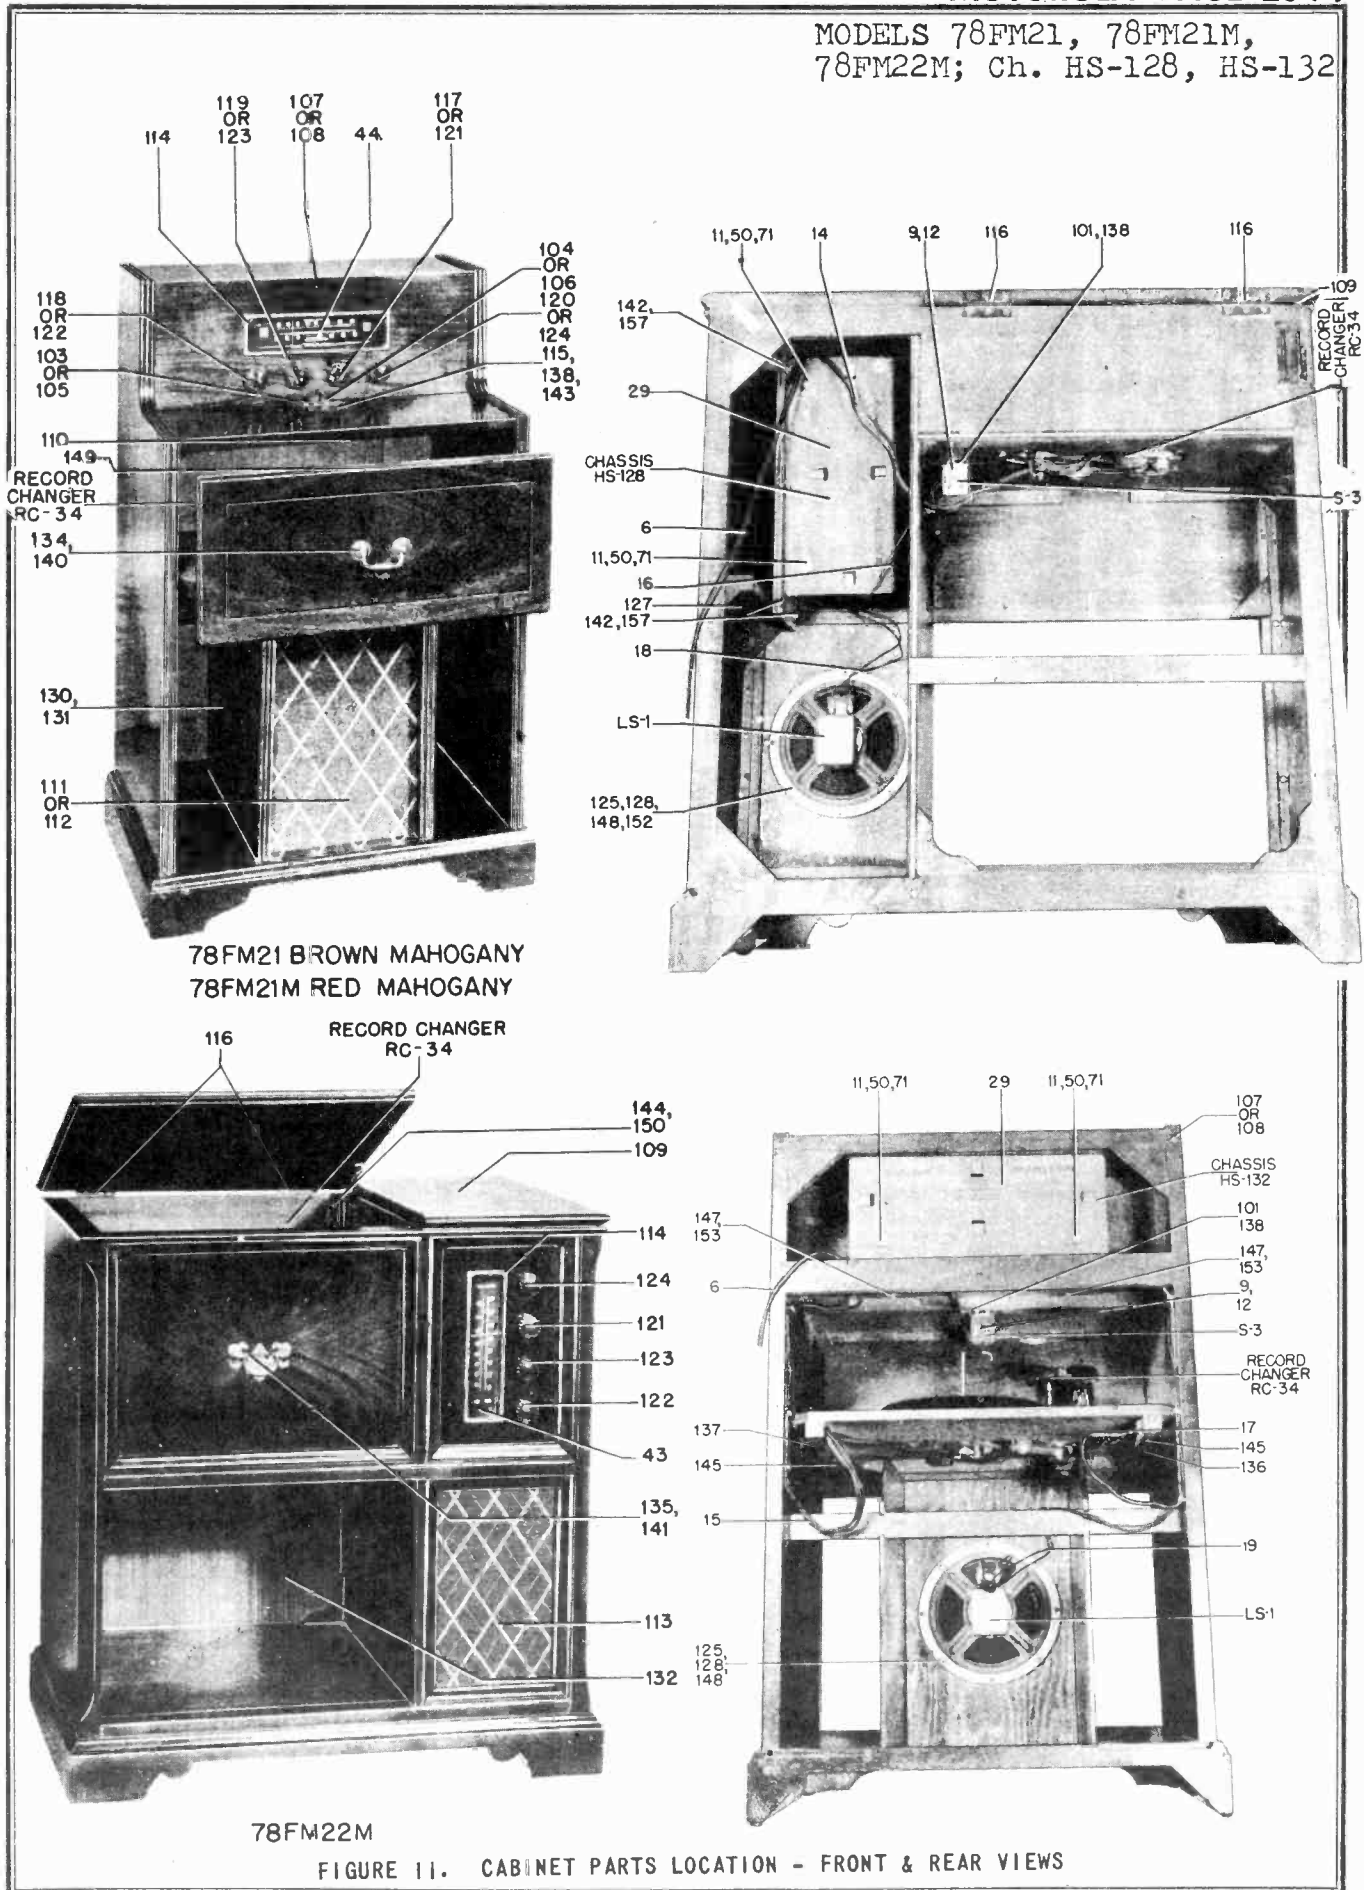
CABINET PARTS LOCATION - FRONT & REAR VIEWS
